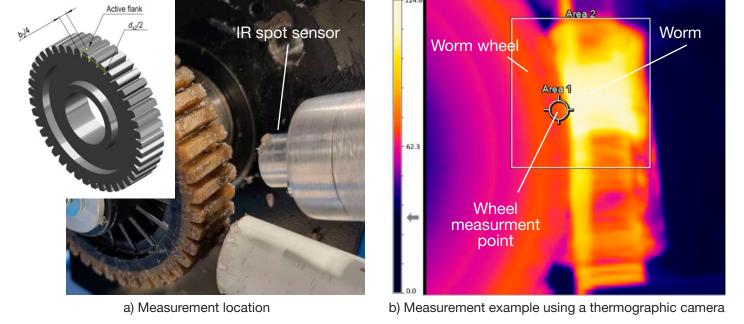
Thermal measurements executed on a worm wheel. a) VDI-specified measurement location and b) measurements executed on a worm wheel using a thermal camera.
